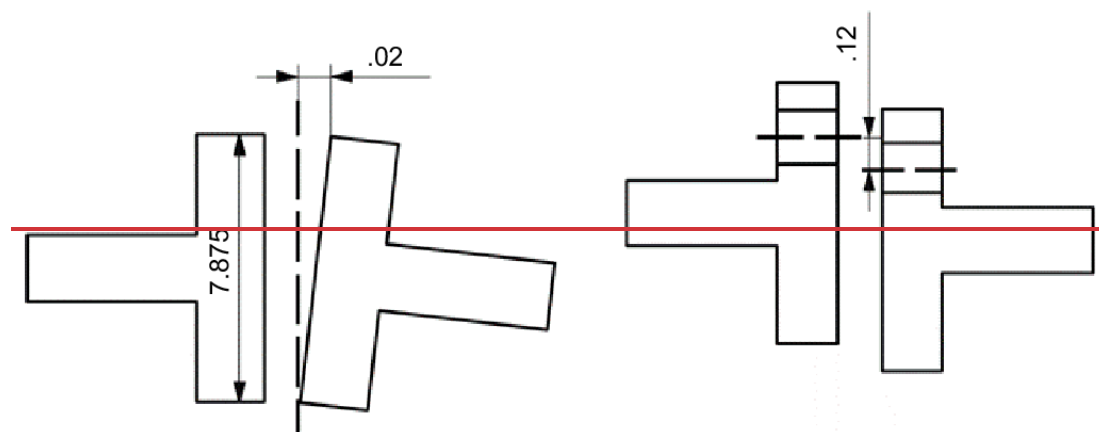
Flange-to-flange Alignment Tolerances
